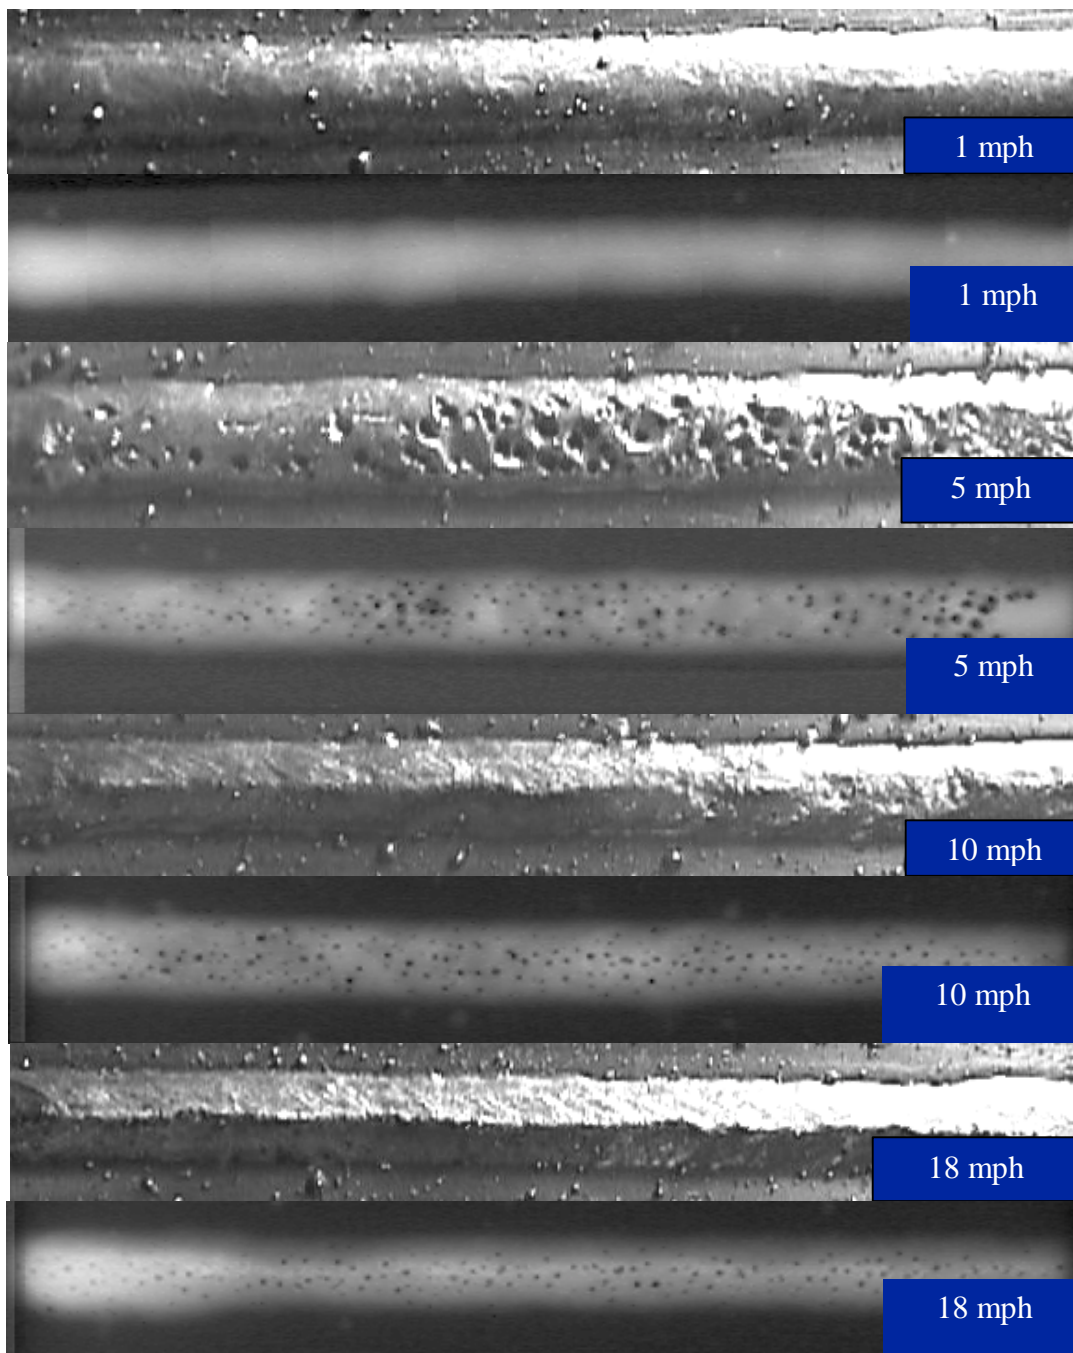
Macrophotograph (top pictures) and Radiographs (bottom pictures) of the E71T-1 Bead-on-Plate Welds Deposited Under a Range of Wind Conditions
